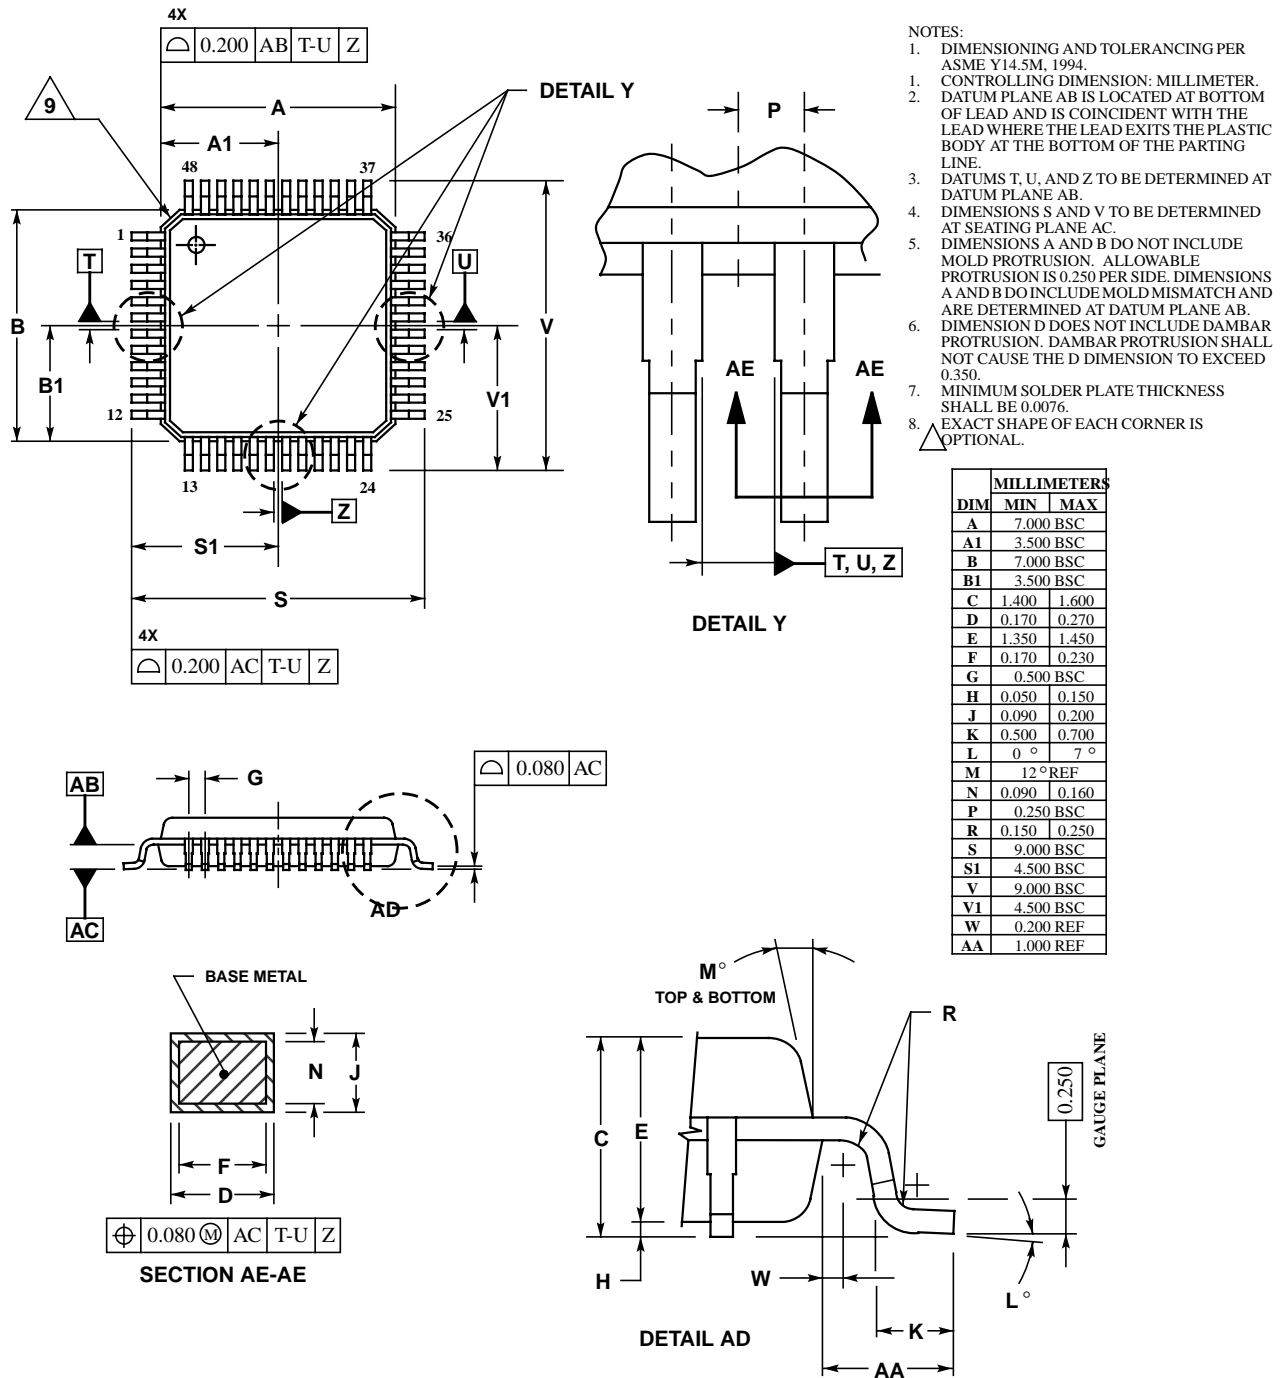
48-pin LQFP Mechanical Dimensions (case no.932-03 ISSUE F)
